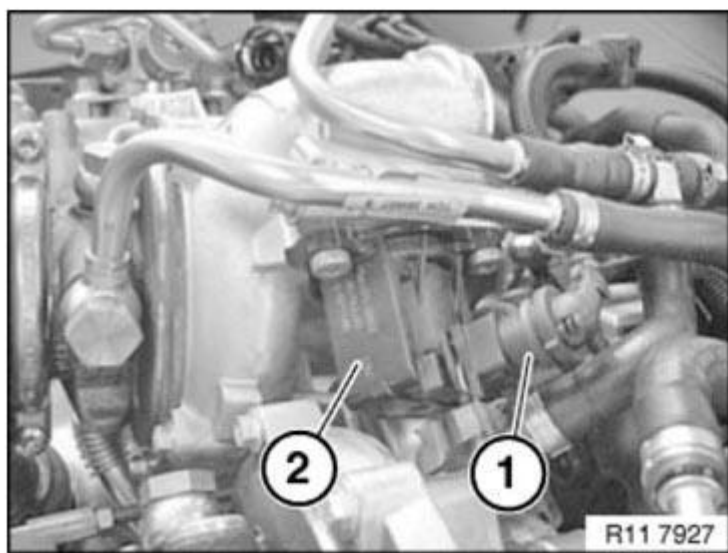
Identifying Plug Connection On Electric Changeover Valve
